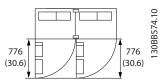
Space in front of IP21/IP54 enclosure type, frame size F10
